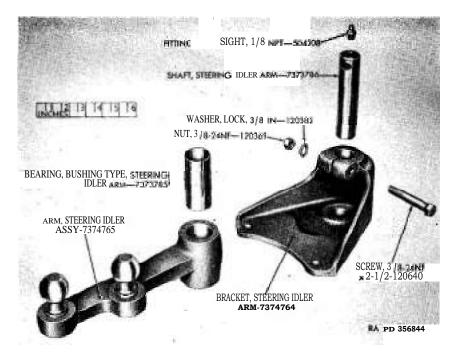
Steering idler arm assembly and steering idler arm bracket with related parts.
